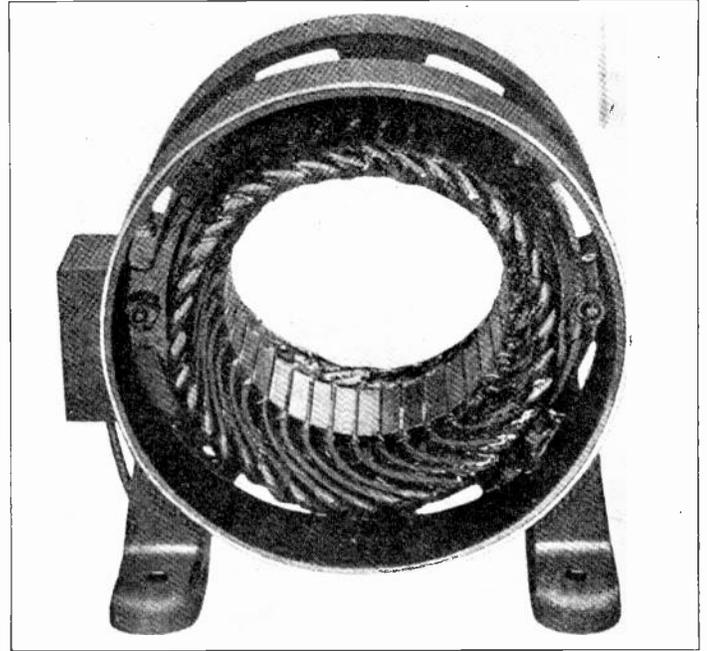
This view shows a stator of an induction motor with the end shields and rotor removed. When A. C. is applied to the winding a revolving magnetic field is set up around the inside of the stator core.
